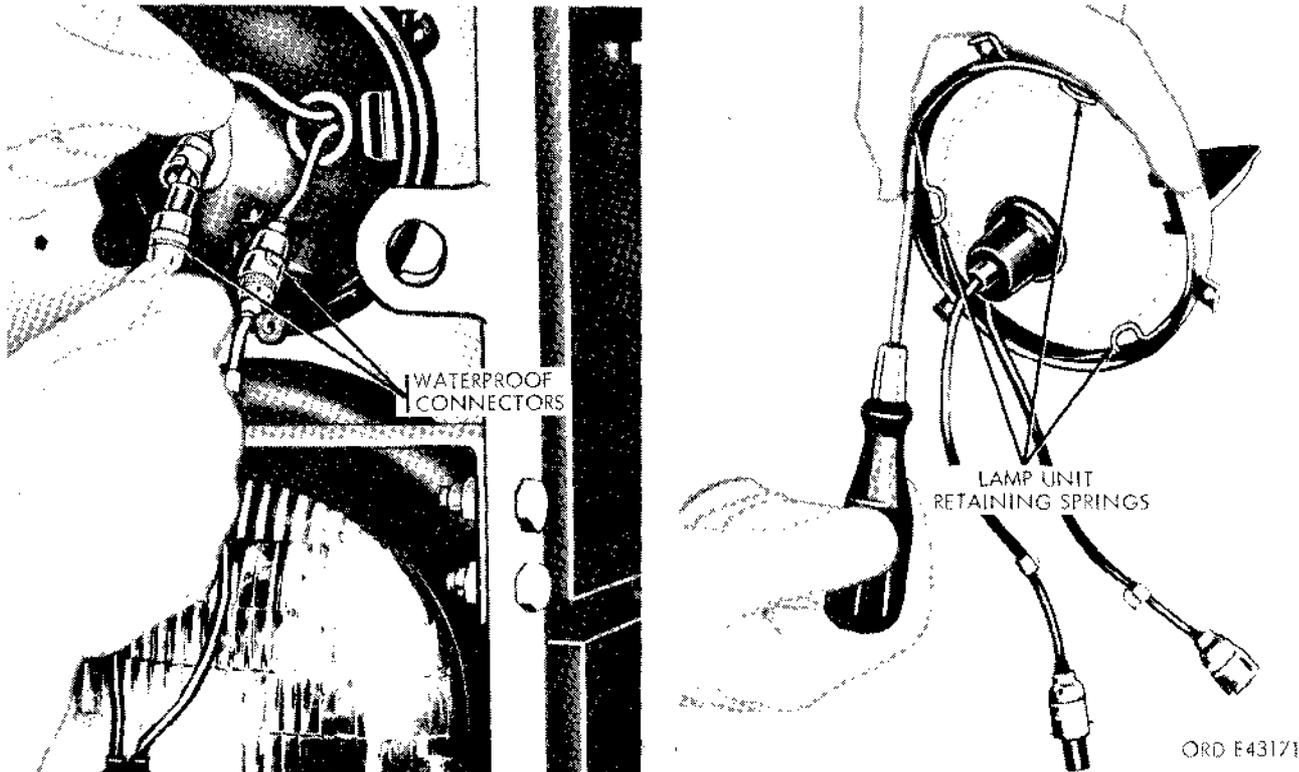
Removing blackout driving light sealed-beam lamp unit.
